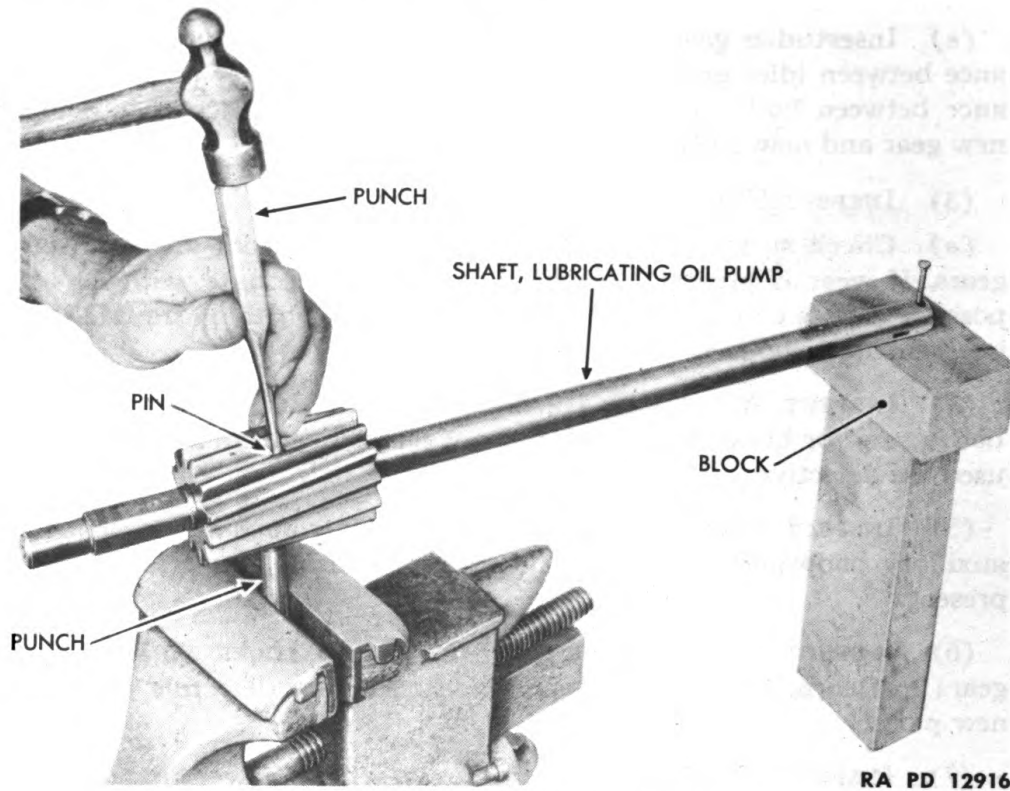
Locking Pin Which Holds Lubricating Oil Pump Body Gear on Shaft
